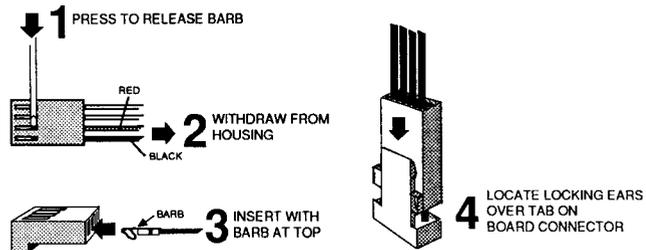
Removing/inserting LED wires in LED/speaker connector
